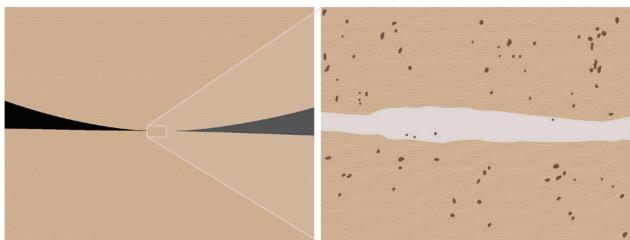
Welding zone. Left: Section of the welded tip (top) onto the pin (bottom). Right: Detail of the welding zone showing the formation and solidification of molten metals forming an alloy. Image credit: ABB.
